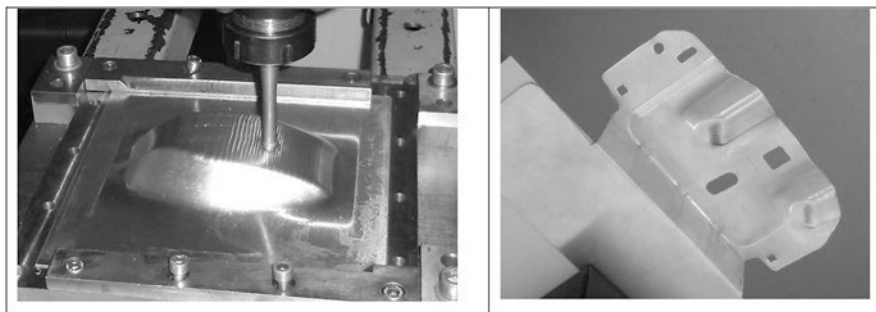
Incremental sheet forming for automobile shapes (left: tank; right: fender after trimming and cutting operations)
